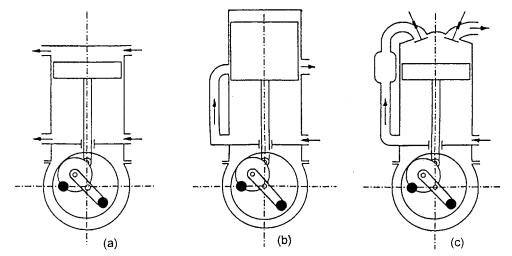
Double acting hypocycloid machines: double acting reciprocating compressors (a), two-stroke engines with the scavenging pump separated from the crankcase (b), four-stroke engine with built-in surcharging compressor (c).
